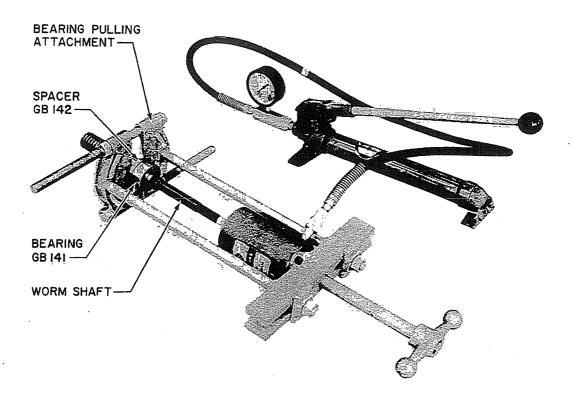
Worm Shaft, Removal of Bearing GB141 and Spacer GB142
